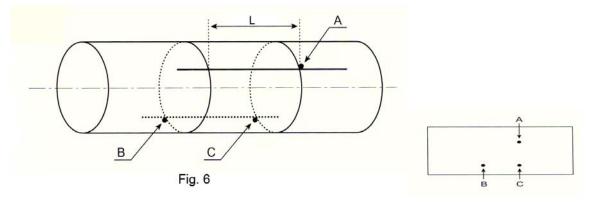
Remove the positioning paper, prepare weld the ball valve bases on A and B point, note that the center point of Ball Valve Base coincidences with the A, B points.
